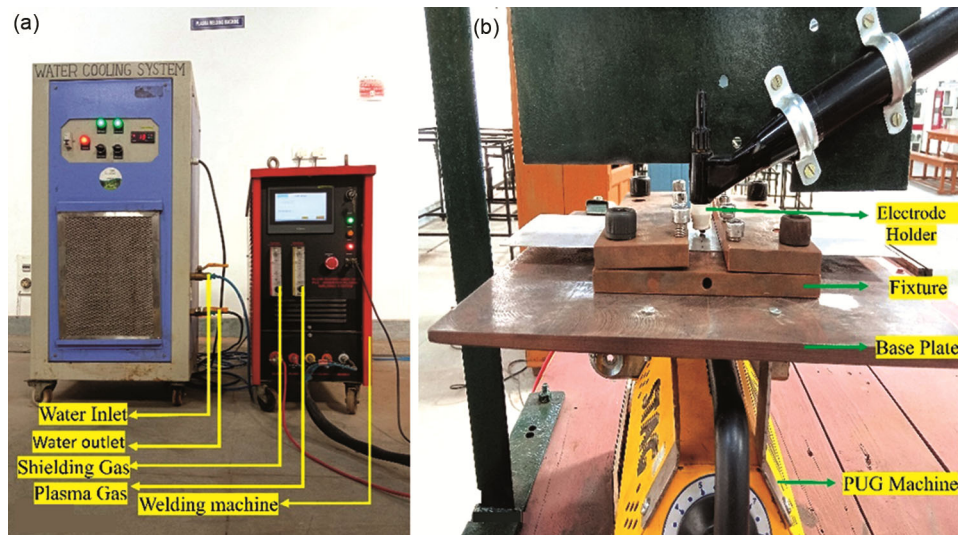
(a) Welding machine, and (b) Welding setup along with the torch and fixture arrangement.
